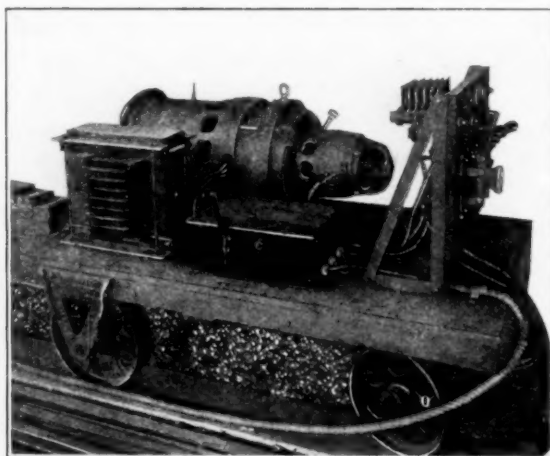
PORTABLE MOTOR-GENERATOR ARC-WELDING SET
